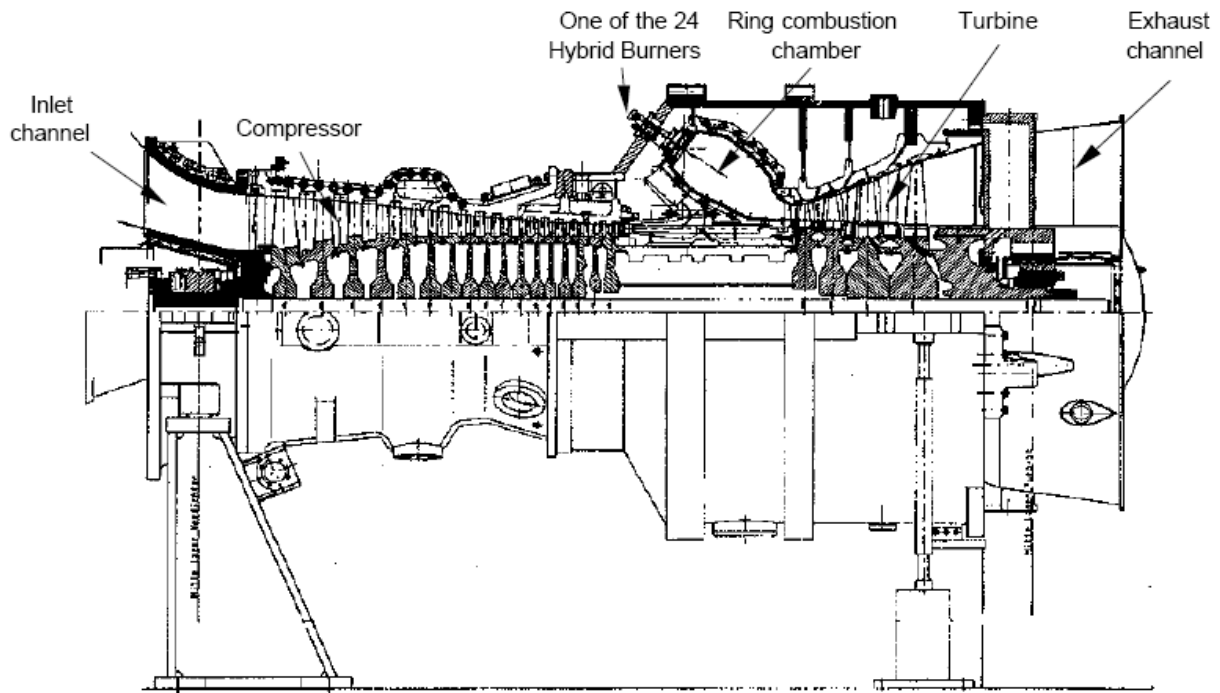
Half-section drawing of a Vx4.3A series gas turbine.
